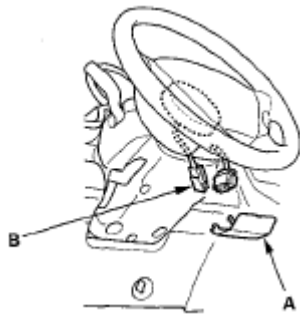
Identifying Access Panel And Driver's Airbag 4P Connector
